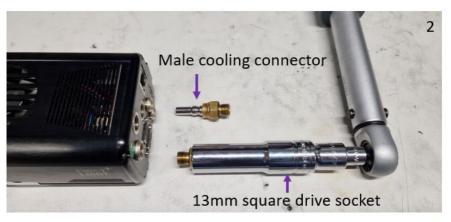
Using a 2.5 N.m torque screwdriver (1), screw the 2 male coupling connectors (2,3).
